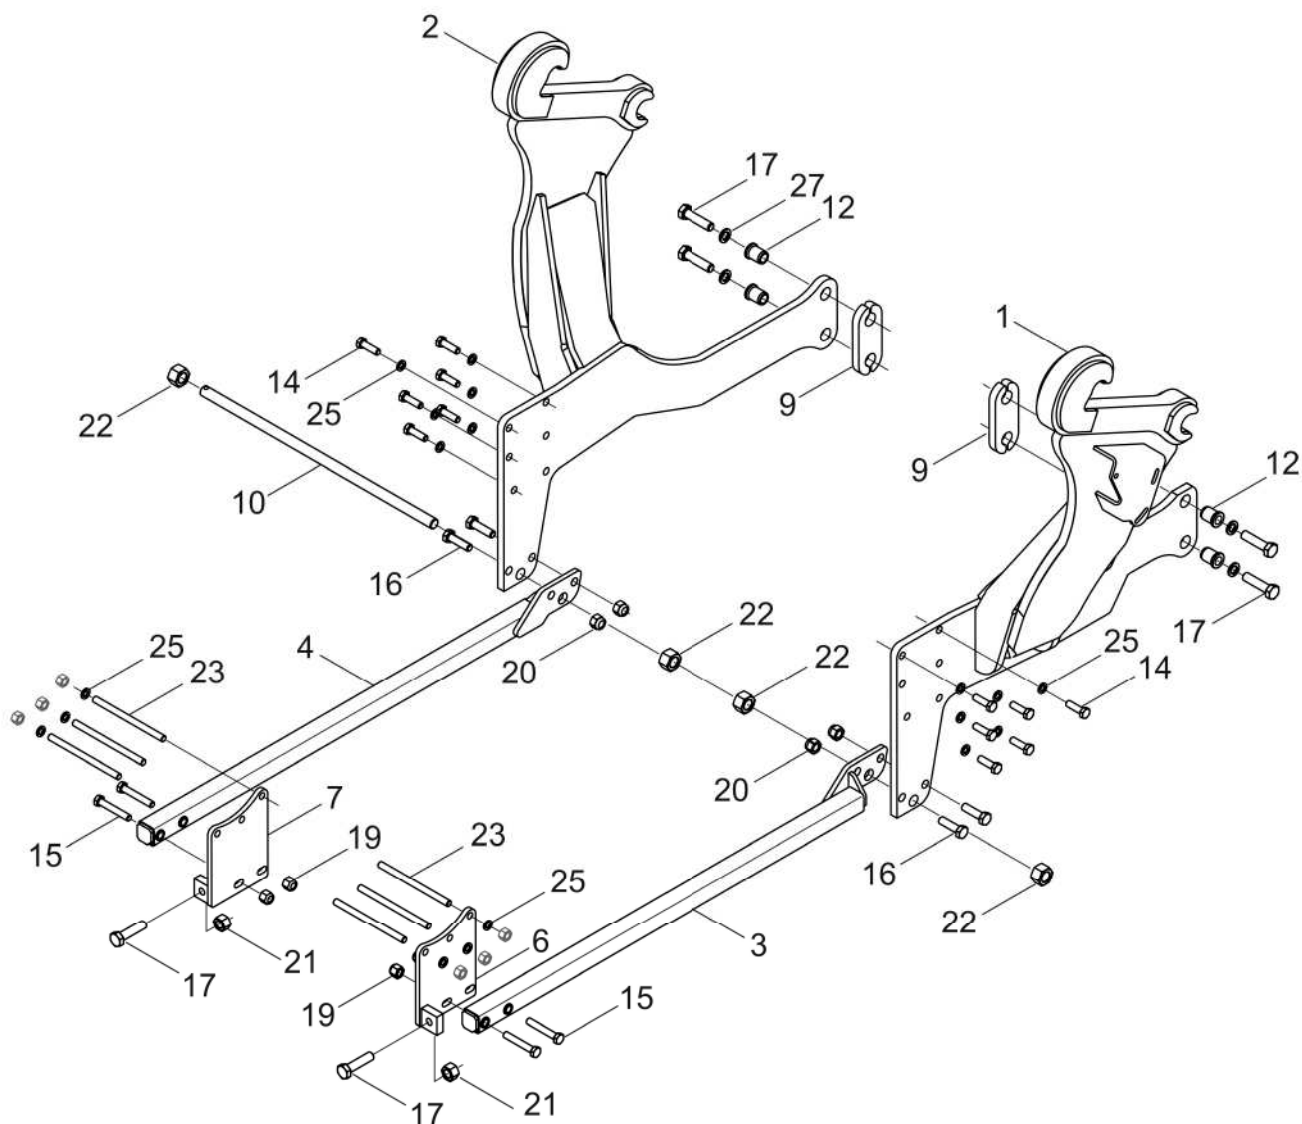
A Mounting support frame on Zefir 40/40K tractors
